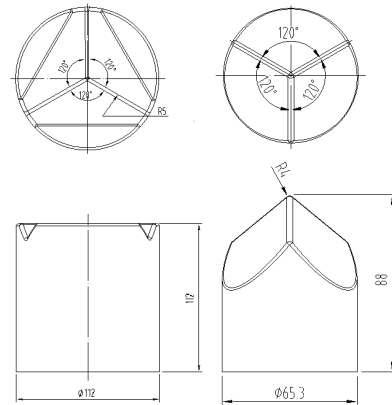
Dimensions of the tools (mm) used in the pressing process
